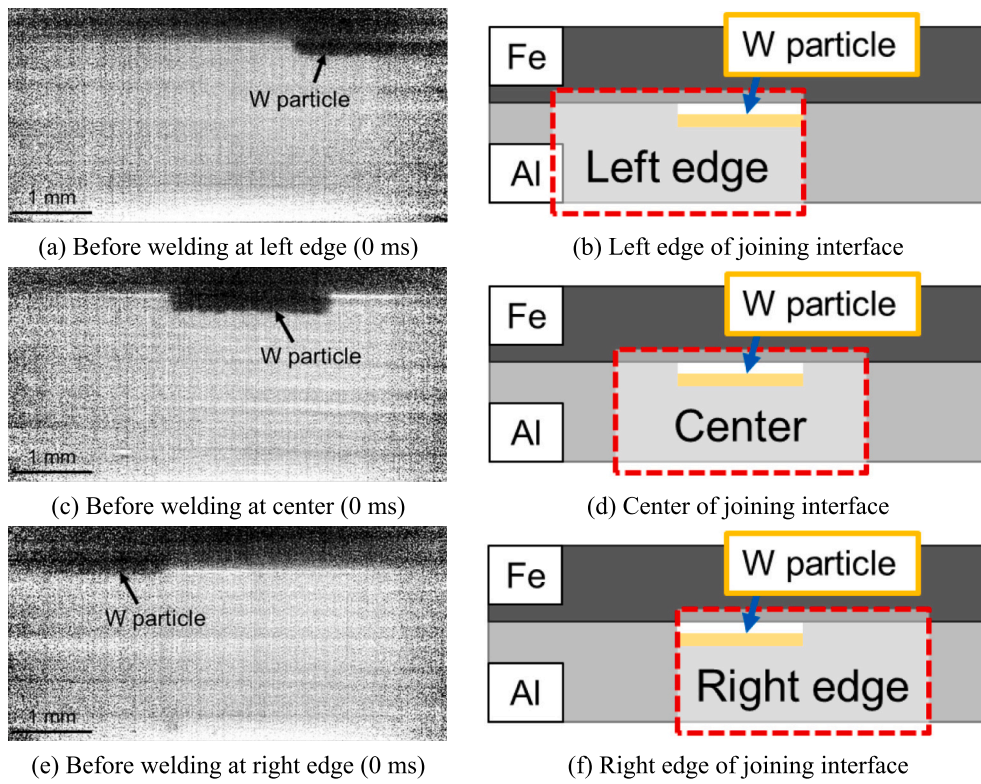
Positions for observing convection. (a) Before welding at left edge (0 ms). (b) Left edge of joining interface. (c) Before welding at center (0 ms). (d) Center of joining interface. (e) Before welding at right edge (0 ms). (f) Right edge of joining interface.
